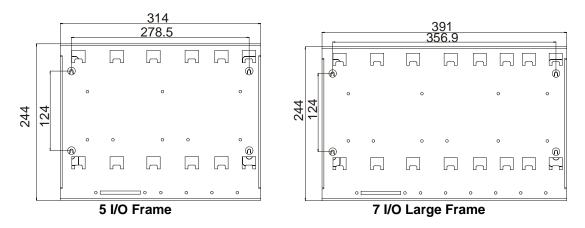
5 I/O and 7 I/O Frame Installation Dimensions and Screw Holes for Installation
